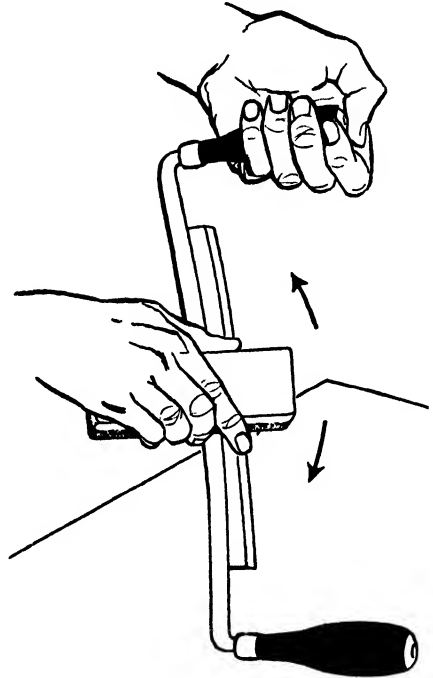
A drawknife is sharpened in the same manner as other keen-edged tools, except that, in whetting, the stone may be rubbed over the edge of the tool instead of moving the tool back and forth over the stone.
